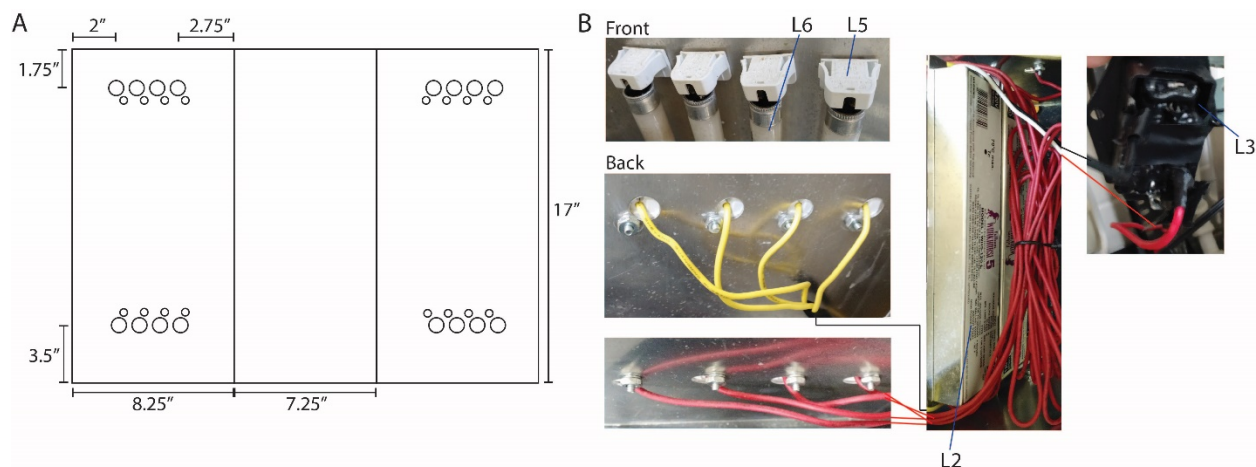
Lighting System Assembly. (A) The sheet metal (L1) was cut to the size shown here and holes were punched for fastening and wire access to the mini bi-pin sockets for the fluorescent bulbs (L5). The sheet metal was folded at a ninety-degree angle on the two indicated lines to form the three-sided shape allowing the assembly to stand up. (B) (Top Left) L5 were installed on the inside of the sheet metal casing at all the locations indicated in (A) for a total of 16. These held the fluorescent tubes in place and provided power from the ballasts. (Middle Left) the sockets on the top of each side were wired to the yellow leads from the ballast (4 bulbs per ballast). (Middle Bottom) the sockets on the bottom of each side were wired to the red leads from the ballast (4 bulbs per ballast). (Center) The ballasts were fixed to the back of the sheet metal assembly. (Right) The black and white power supply leads from the ballasts were wired to a power socket for control of power supply. All labels reference the parts shown in Table A-1.
